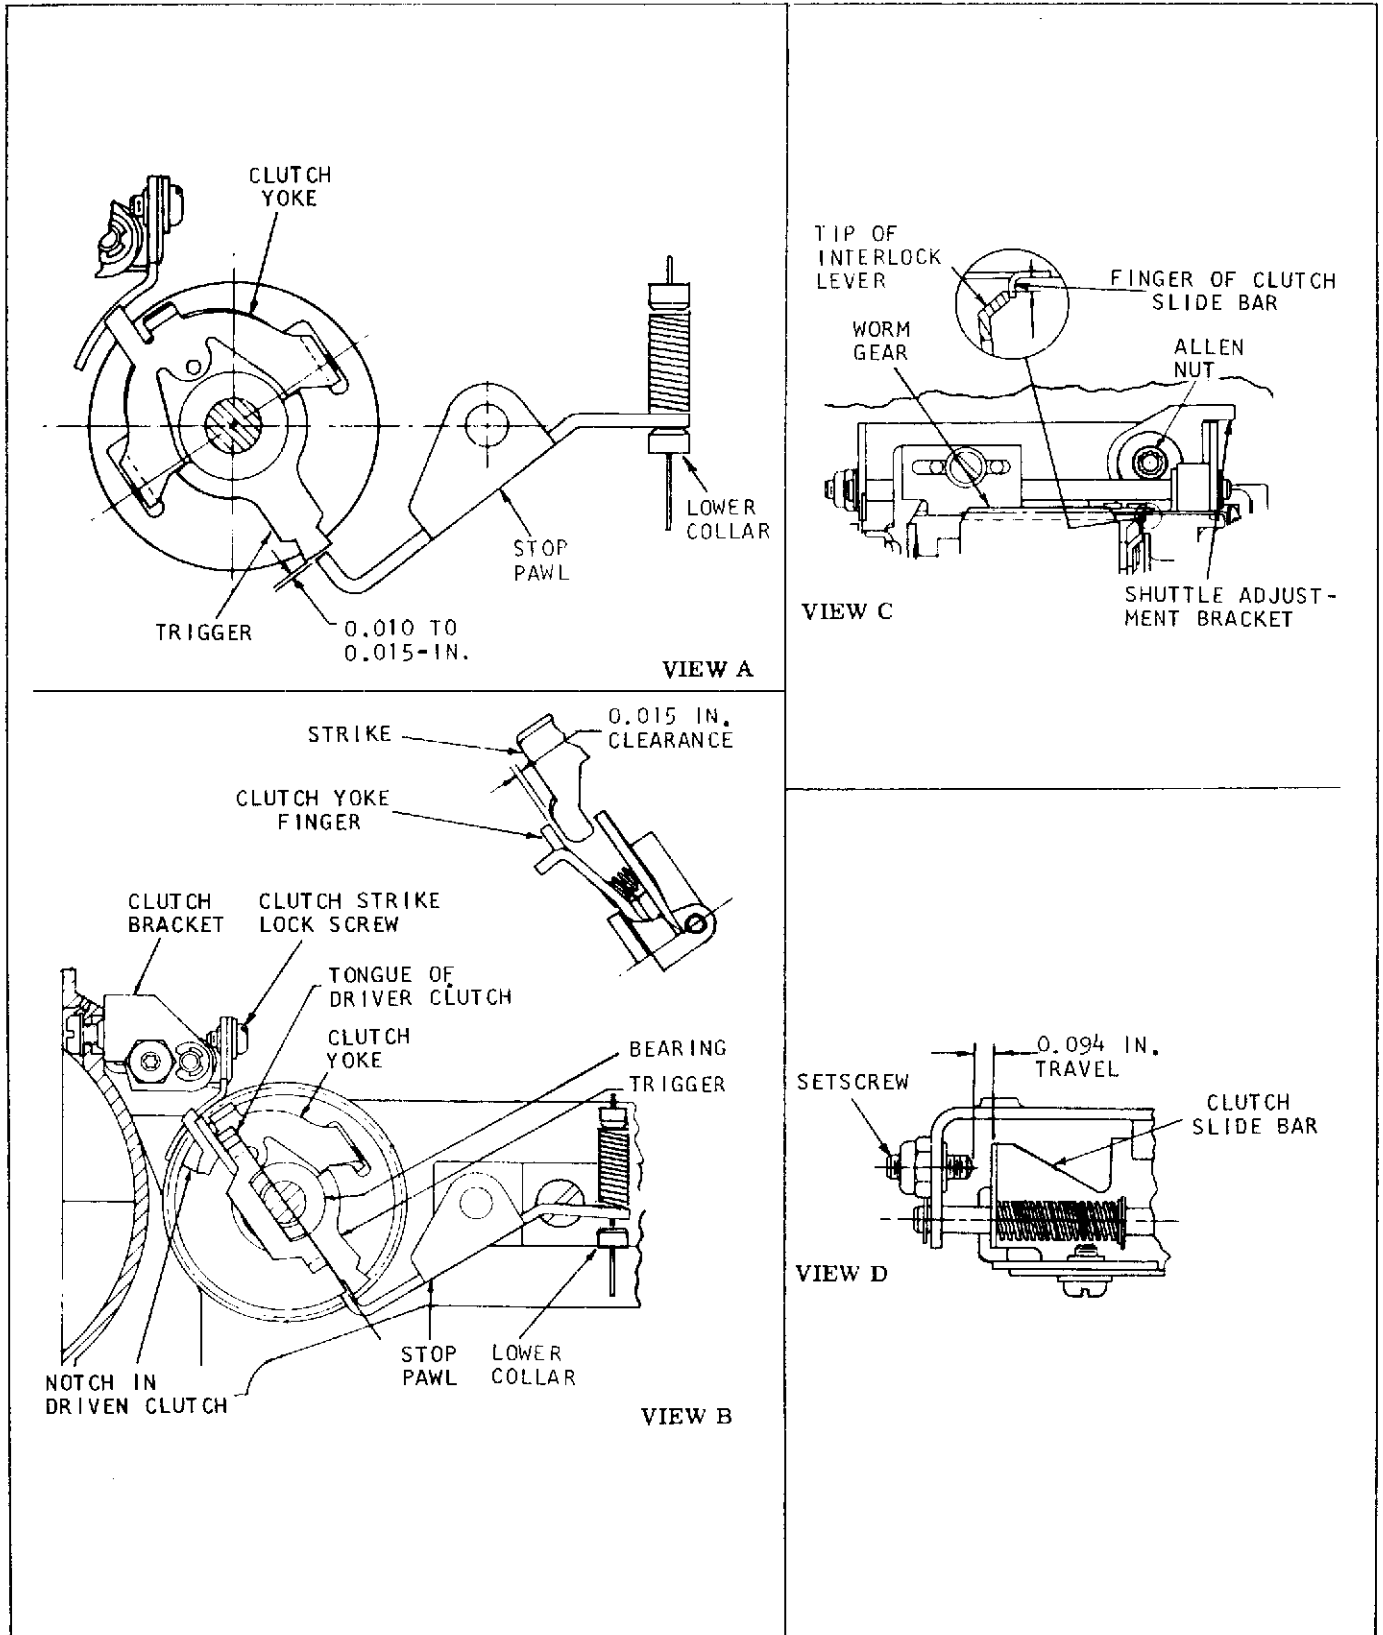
Still-Run Clutch Adjustments — Design 1541 Only
